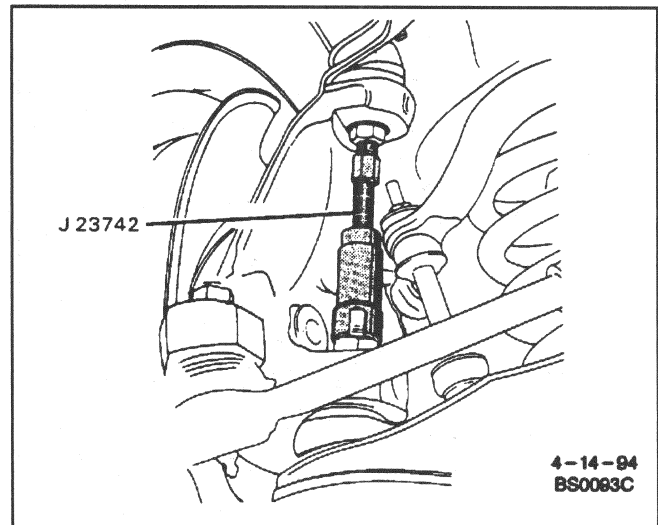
Disconnecting Front Upper Control Arm Ball Stud
